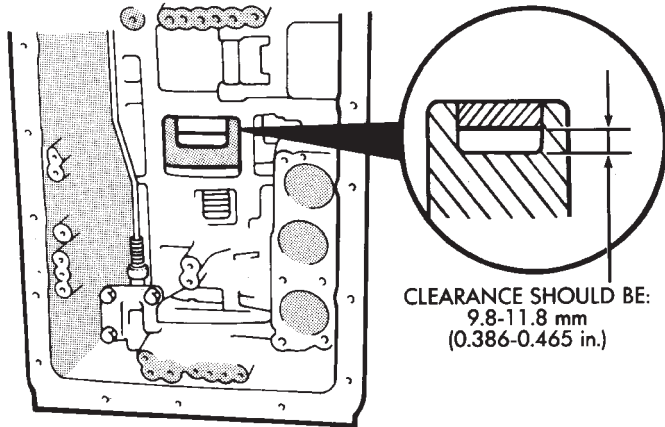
Installing Front Planetary And Forward-Direct Clutch Assembly
